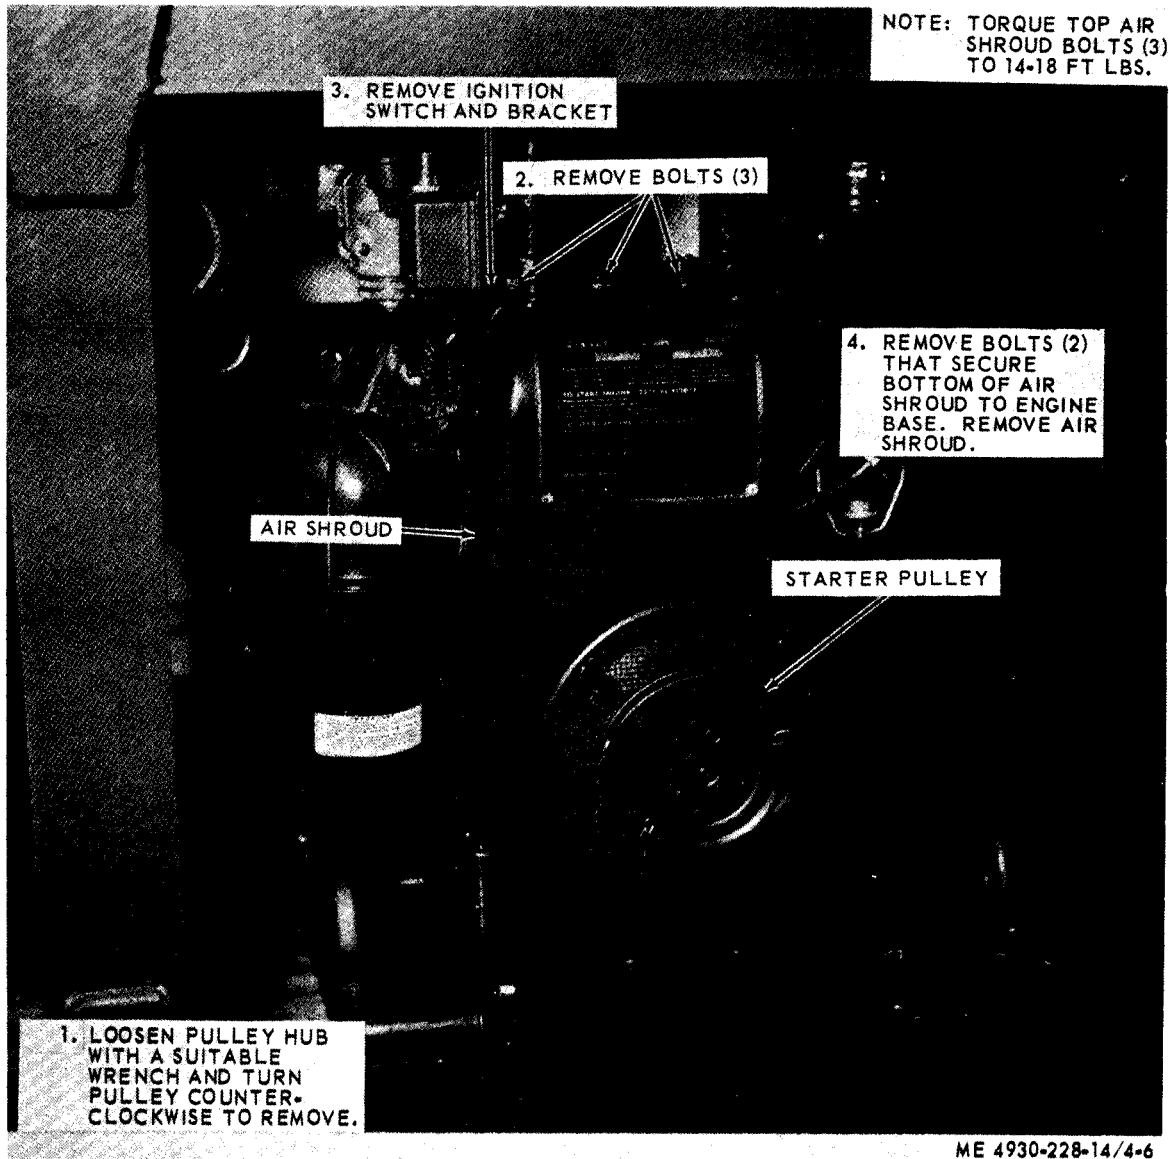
Starter pulley, air shroud, and ignition switch bracket, removal.
